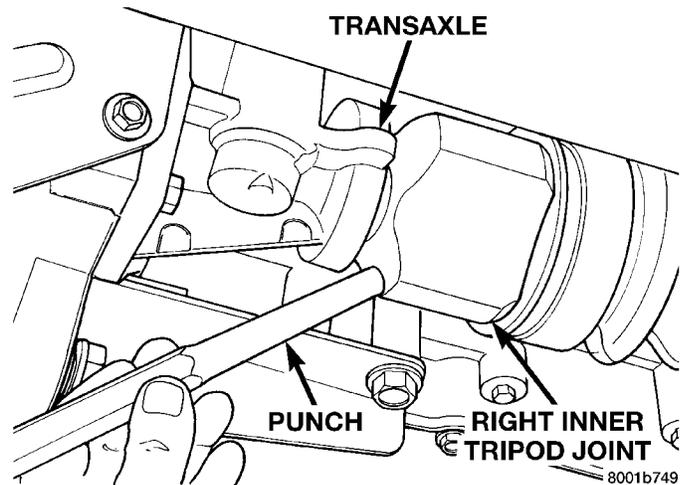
Disengaging Right Inner Tripod Joint from Transaxle
